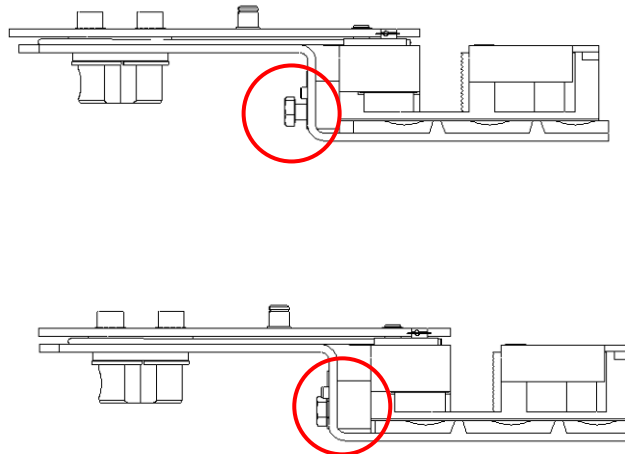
Layout of the on-site adjustment system inside the safety gear
